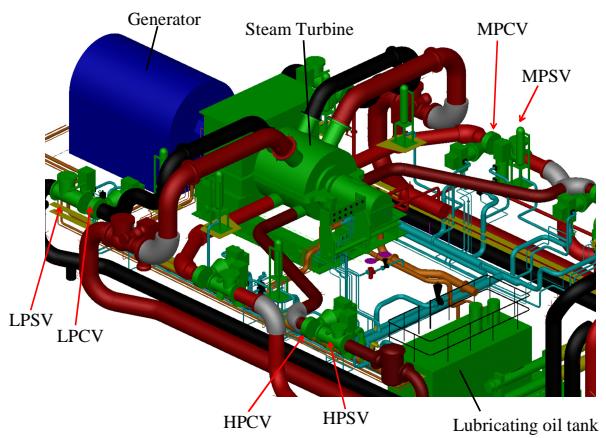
3D view of Svartsengi Unit 6 turbine.
